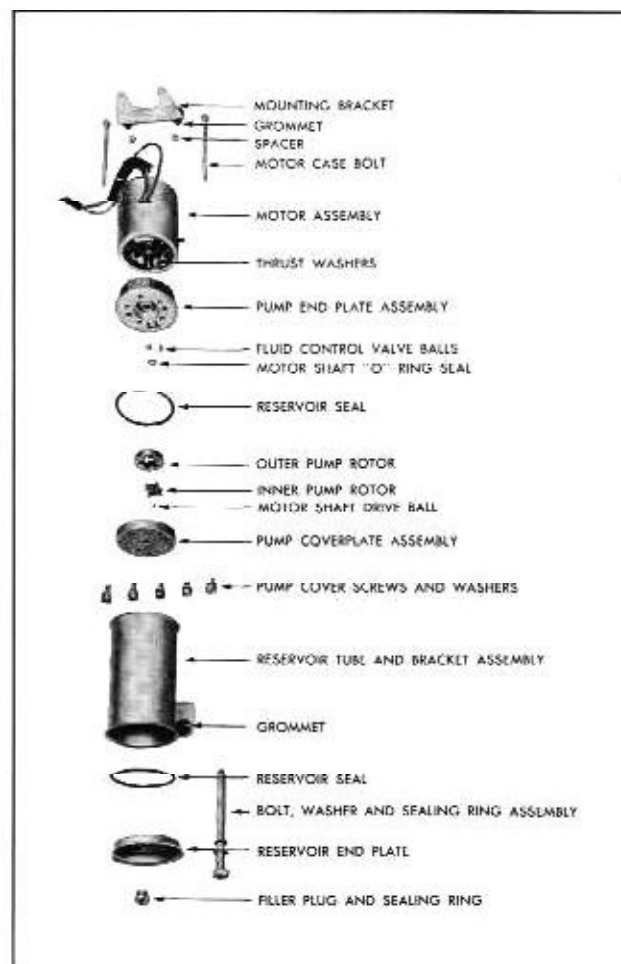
Hydro-Lectric Motor and Pump Exploded
